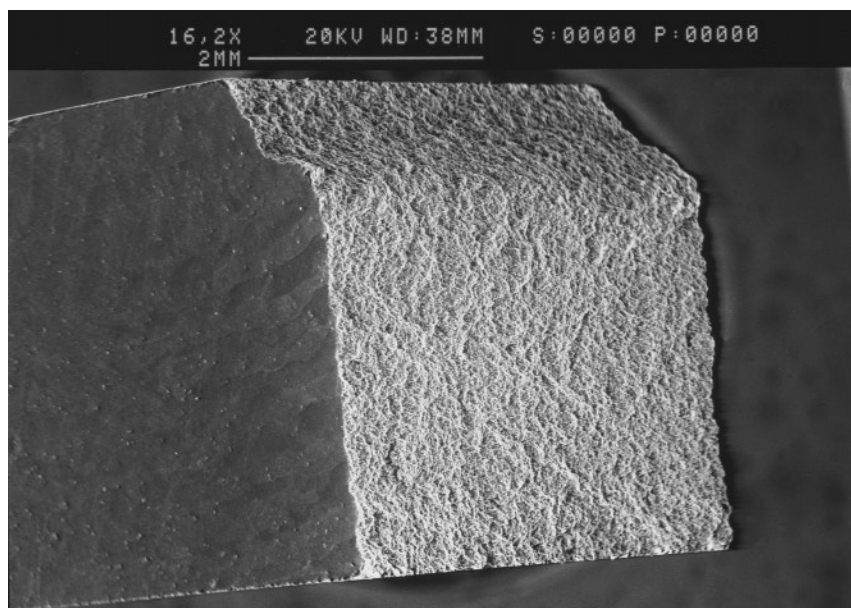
SEM image of an R4340 E specimen after failure under 4-point loading (right hand side of specimen).
